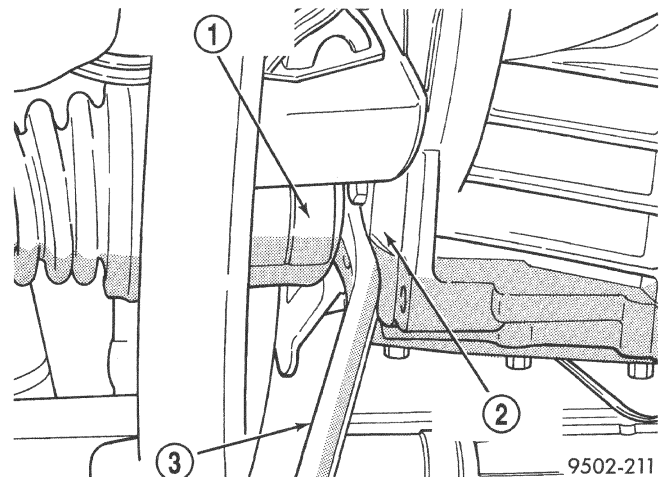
Separating Ball Joint Stud from Steering Knuckle
